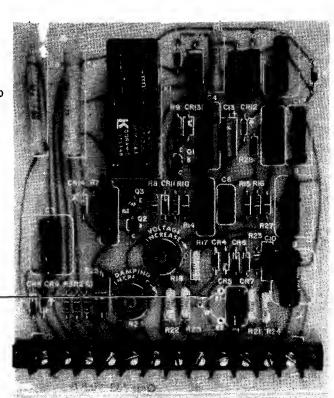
VR21 PRINTED CIRCUIT BOARD
